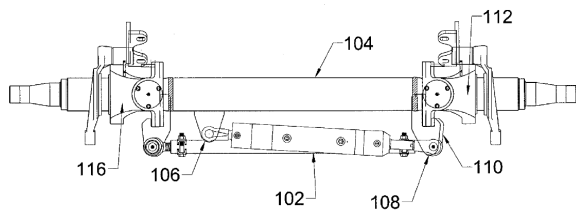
A force steer axle assembly with redundant centering.²⁷⁾
